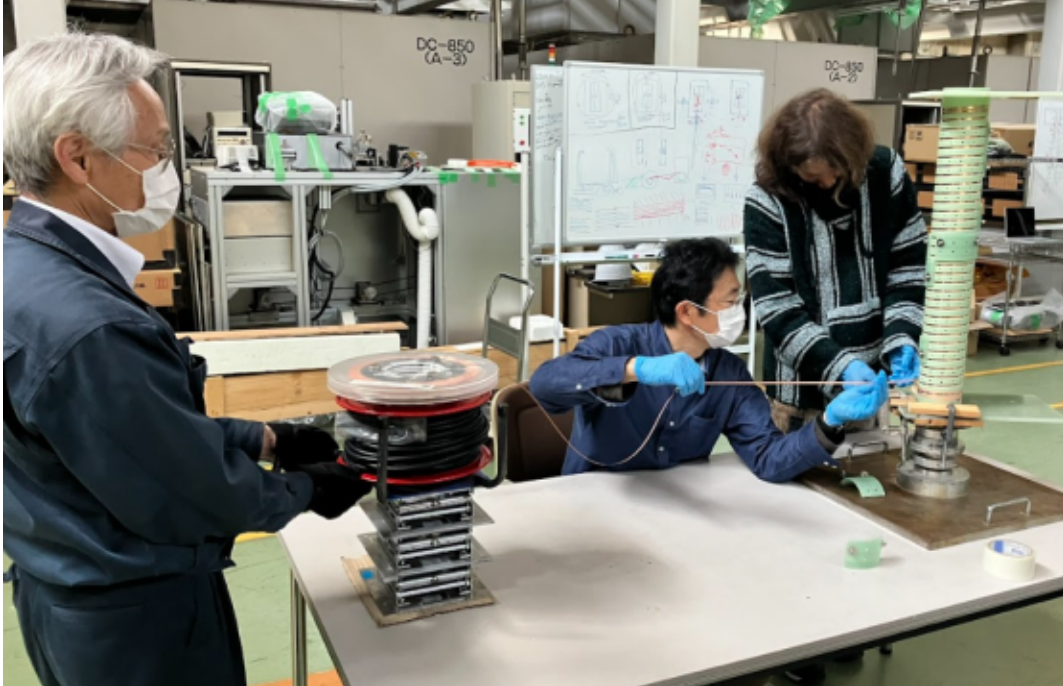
L-RAISER Assembly 2. L-RAISER bobbin and HTS tape roll mounted on two separate rotating structures, so the HTS tape can be wound into the bobbin, securing the HTS tapes with spaced pressure plates.
